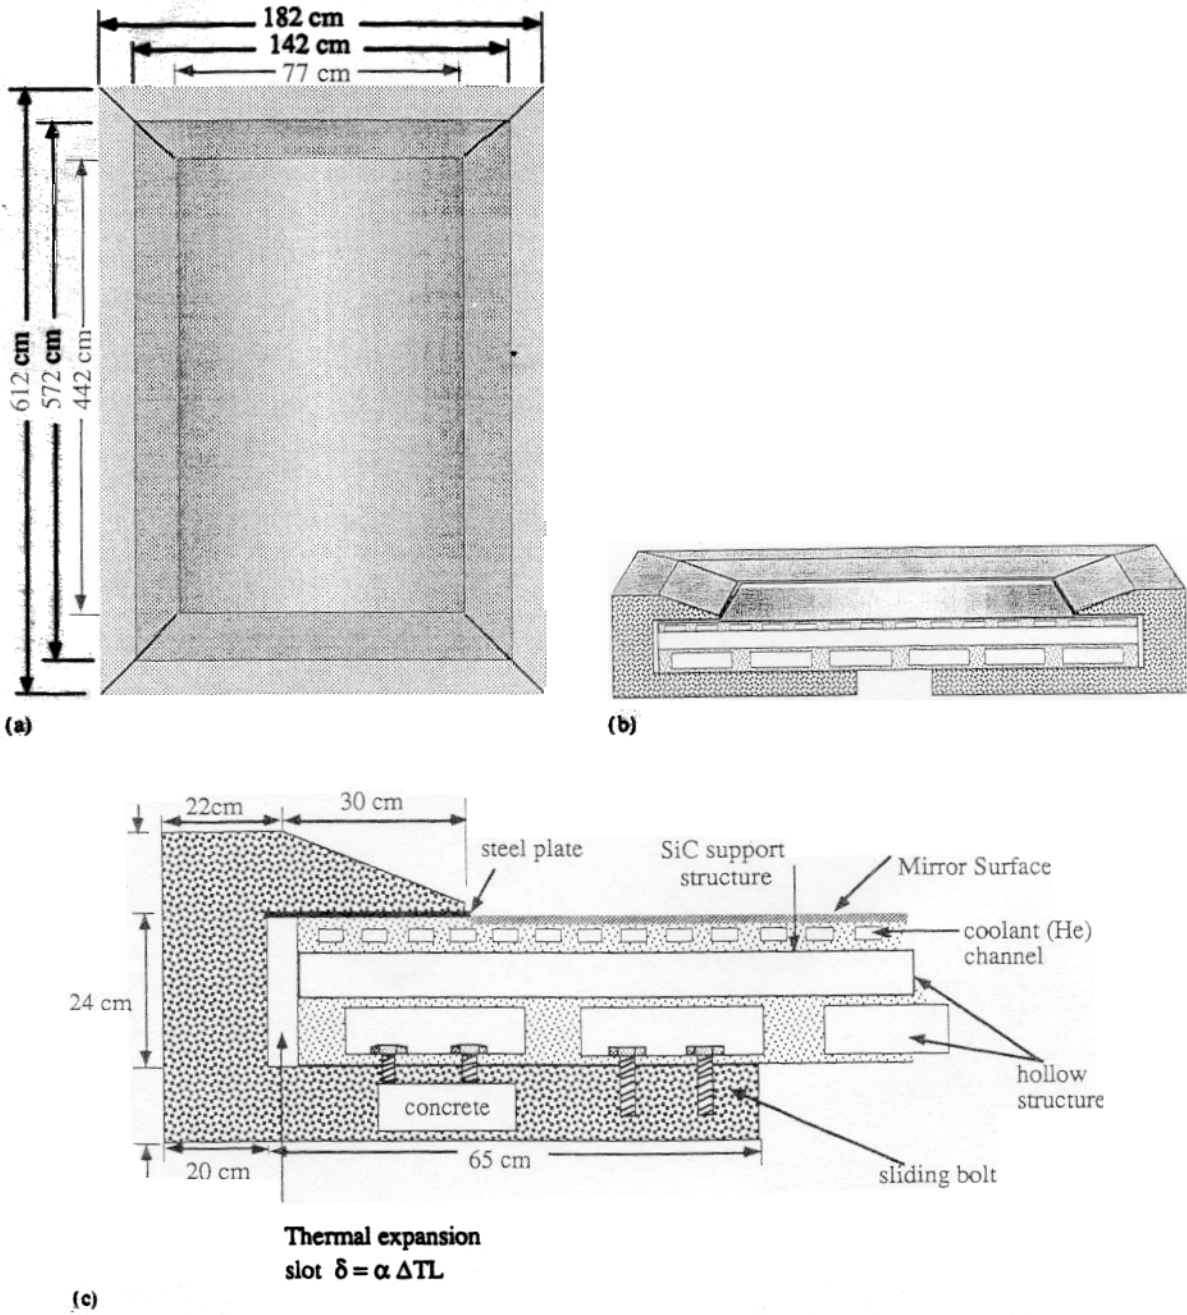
(a) Top view of the mirror showing dimensions; (b) mirror cross-section; (c) materials and cooling details.
